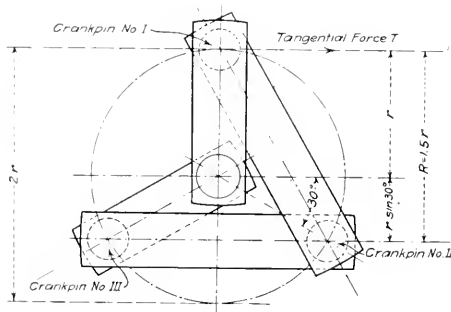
PART OF CRANKSHAFT SHOWING MAXIMUM LEVERAGE IN CASE OF THREE- AND FOUR-BEARING SIX-THROW CRANKSHAFTS
